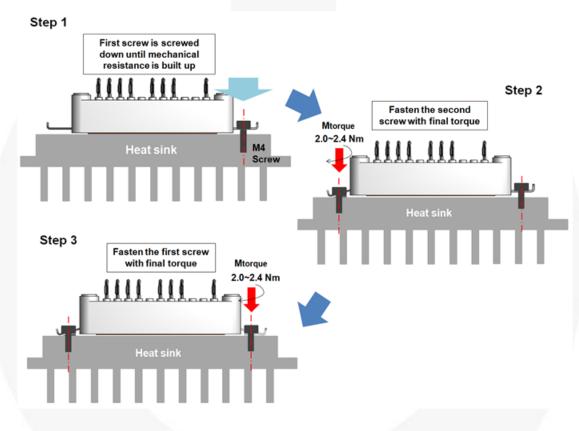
Illustration of Screw Clamping with Heat Sink (Method 2)
